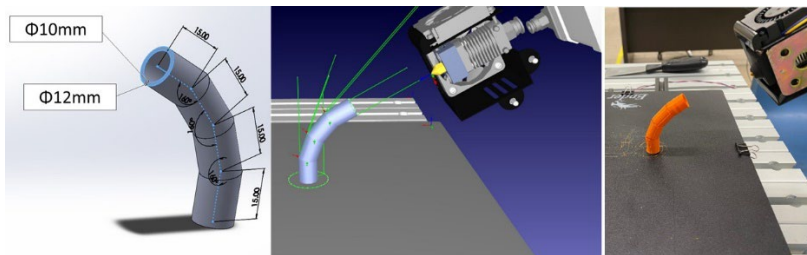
Case A: On the left, CAD model of the workpiece and its dimensions, in the middle CAD model of the workstation, on the right side the printed tube.
